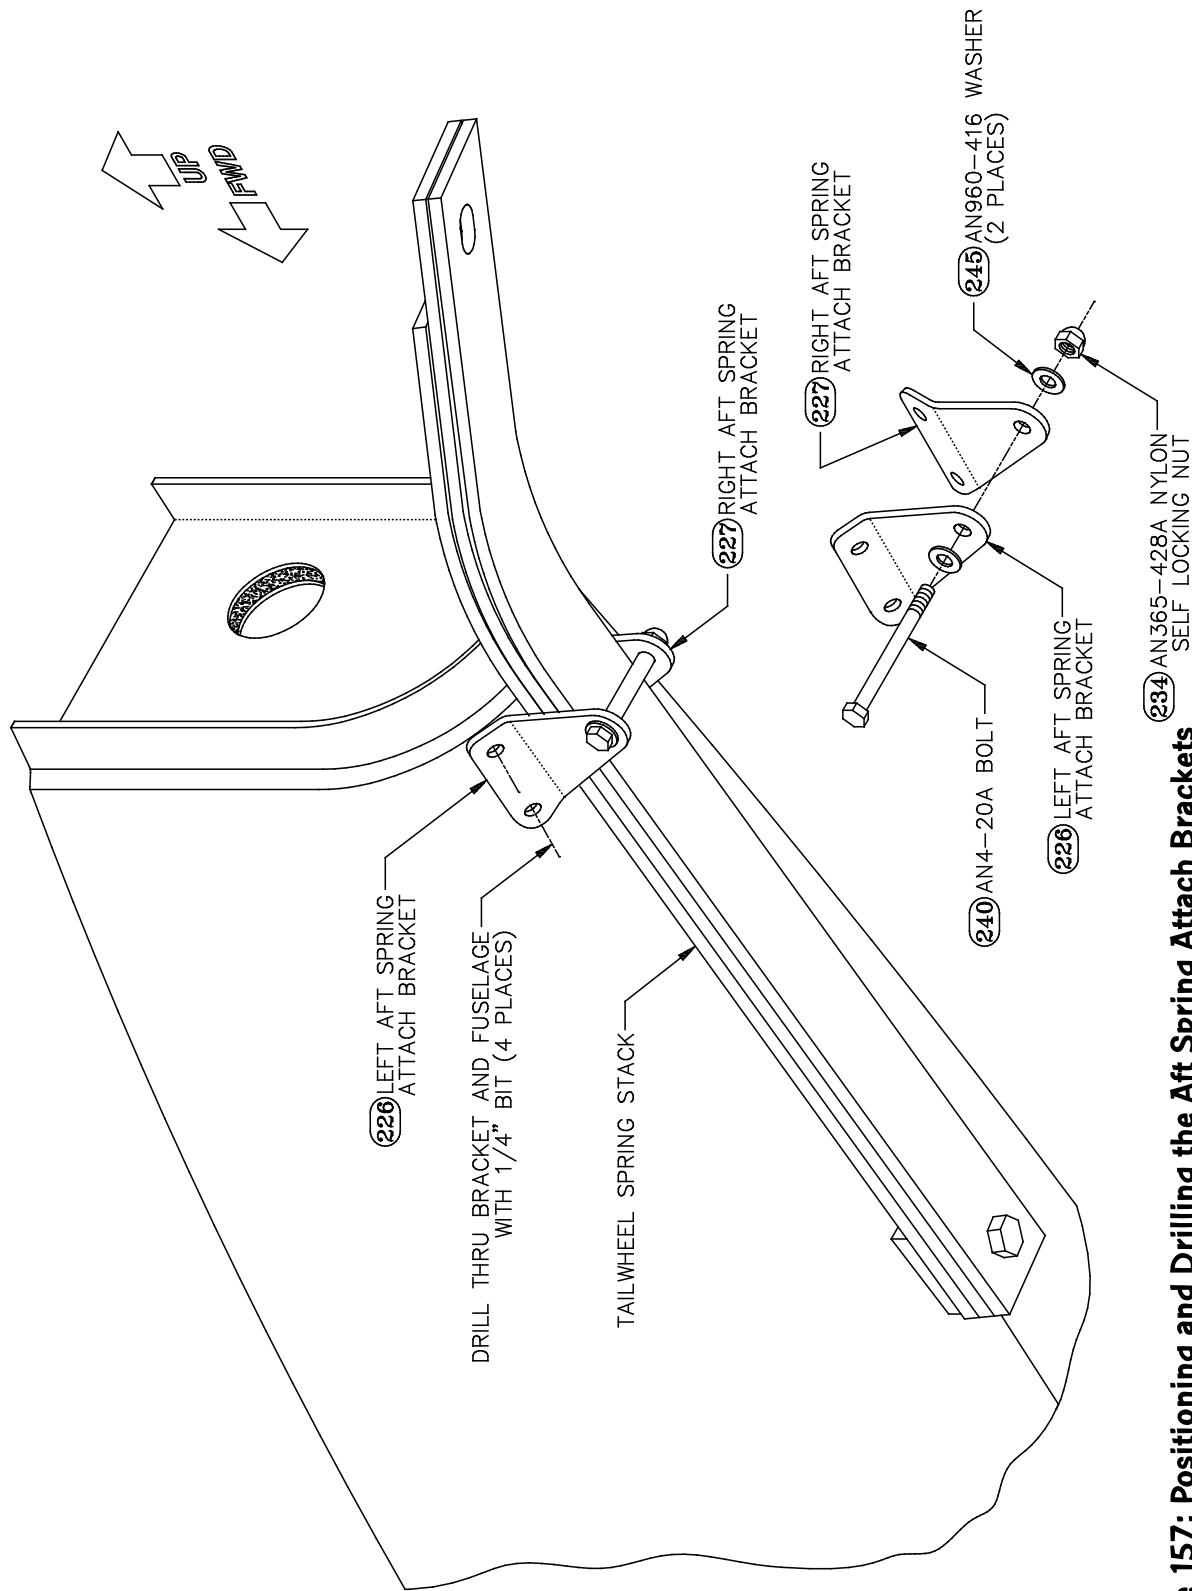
Positioning and Drilling the Aft Spring Attach Brackets
